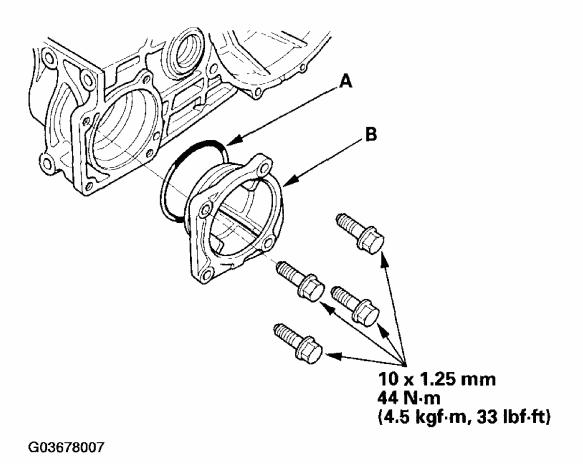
Identifying Tightening Torque Of Side Cover Bolts (2WD Model) Courtesy of AMERICAN HONDA MOTOR CO., INC.
